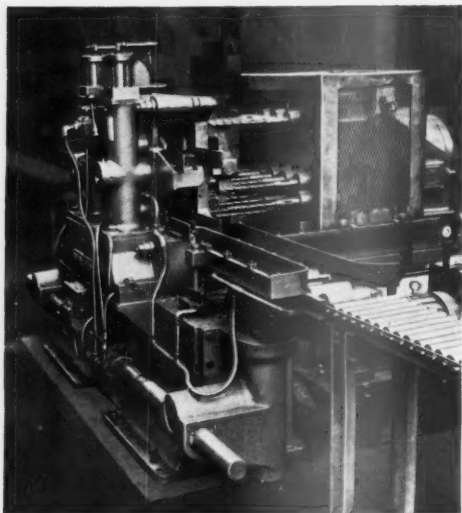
Special Archdale two-stage machine for drilling operations in the cylinder head
